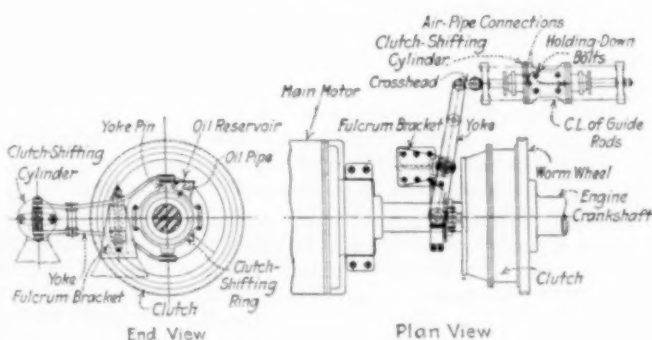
GENERAL ARRANGEMENT OF CLUTCH
